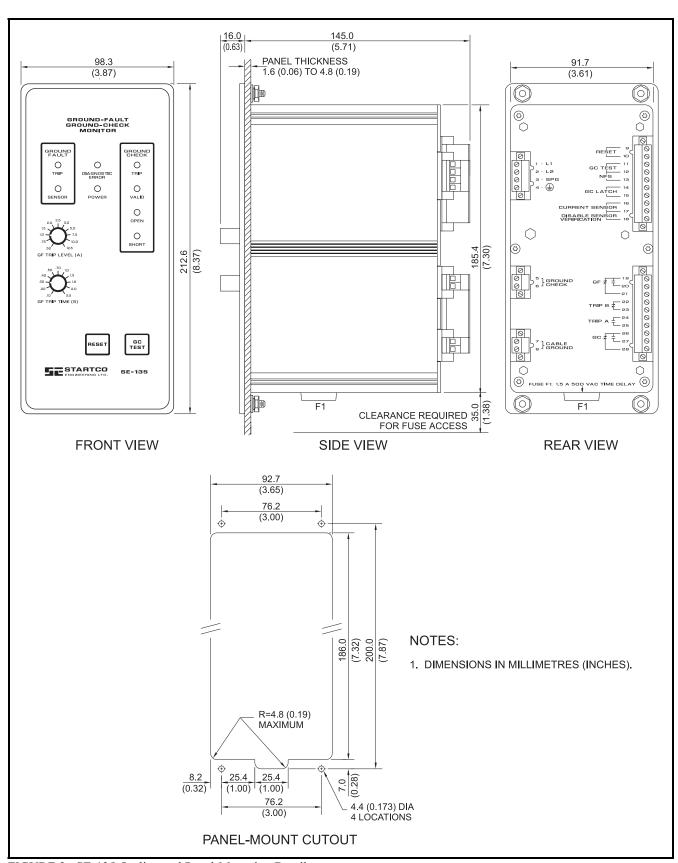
SE-135 Outline and Panel-Mounting Details.
